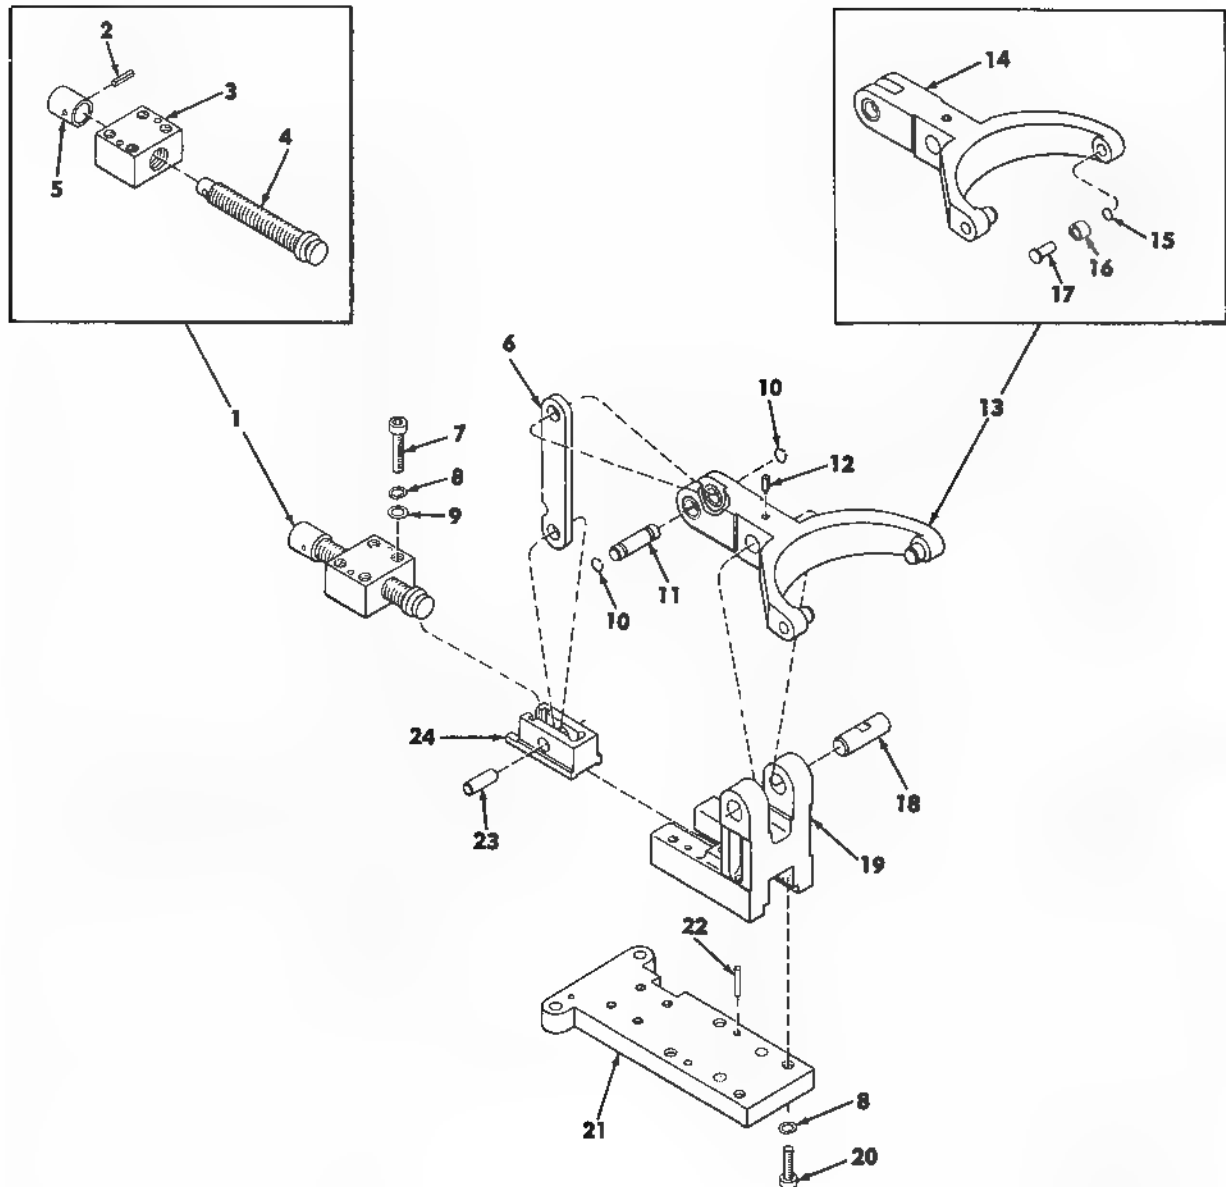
BASE /9015657/-EXPLODED VIEW
